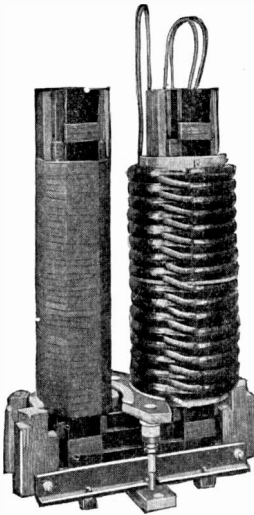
General Electric Core-Type Transformer Partly Assembled
